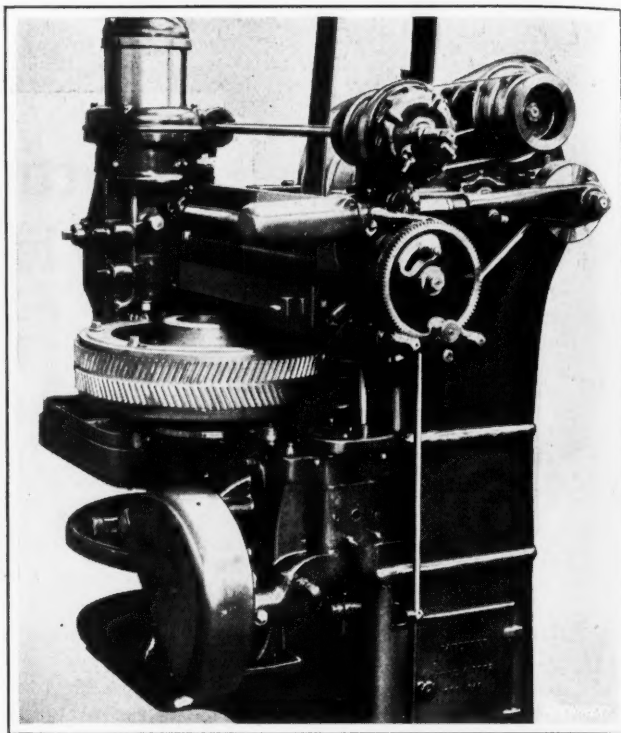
Cutting a Herringbone Gear on a Gear Shaper
